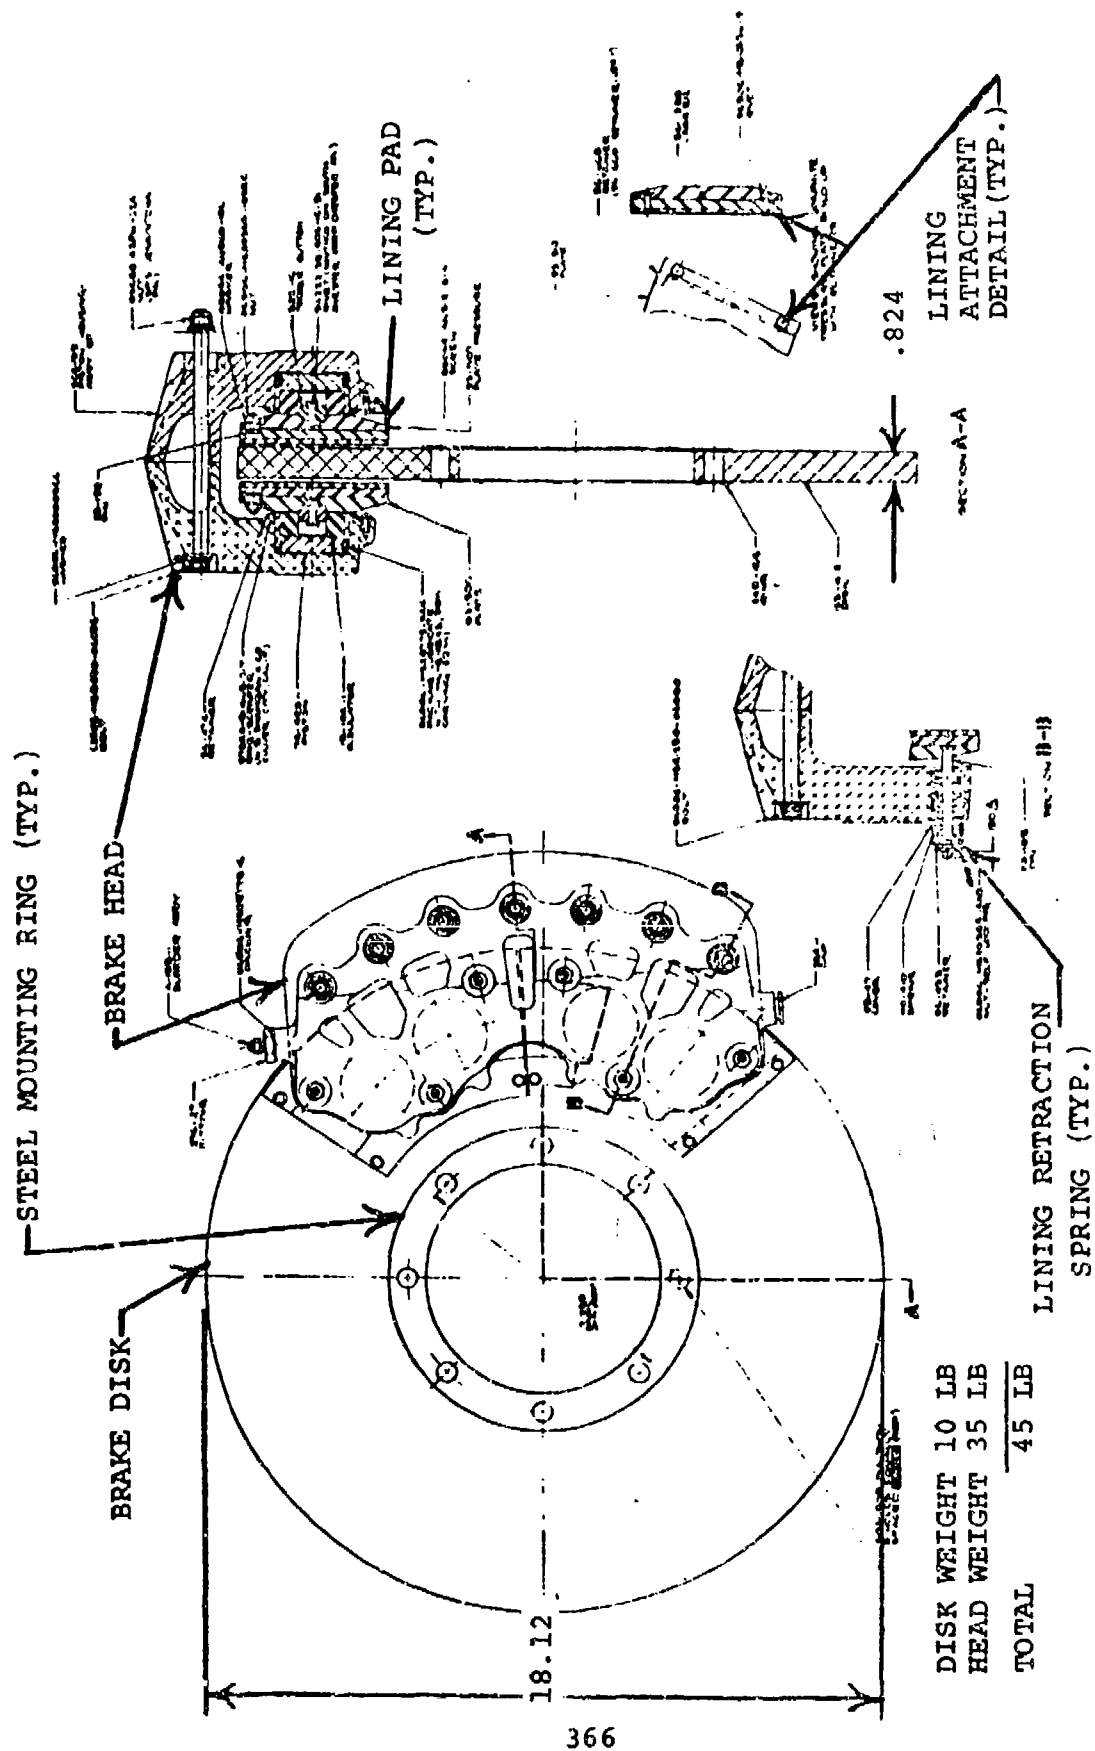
Structural Carbon/Graphite Brake Disk Assembly.
